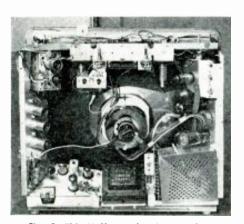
This Hoffman chassis comprises 4 accessible assemblies framing the CRT.
